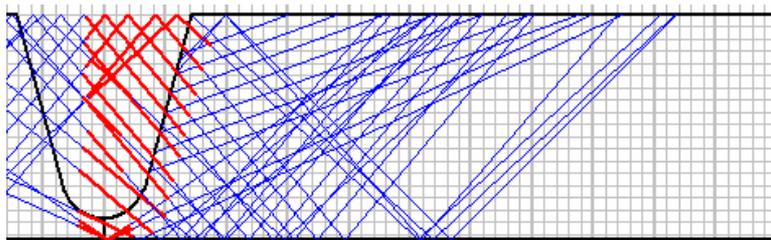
Ray tracing showing partial coverage of premium weld.
